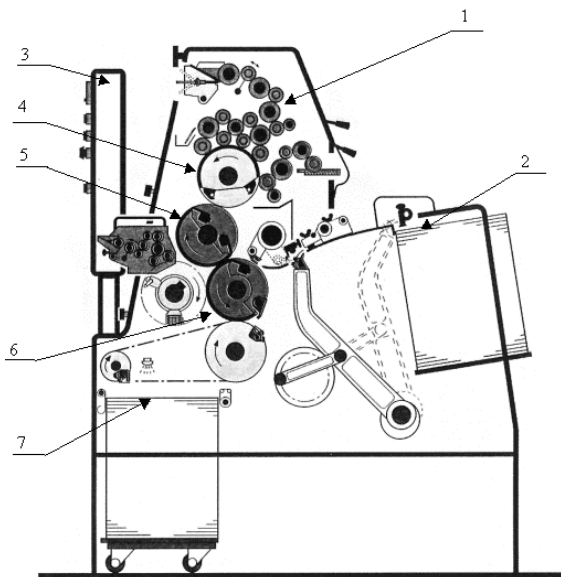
The schematic diagram of a printing machine: 1- ink apparatus; 2 – paper feeding mechanism; 3 – control block; 4 - plate cylinder; 5 - blanket cylinder; 6 - impression cylinder; 7 – printed materials sorting mechanism
